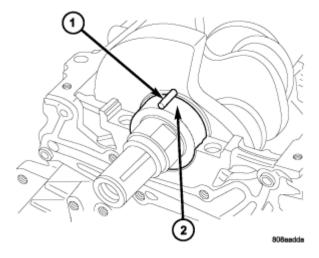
Plastigage Placed in Lower Shell-Typical Courtesy of CHRYSLER LLC
